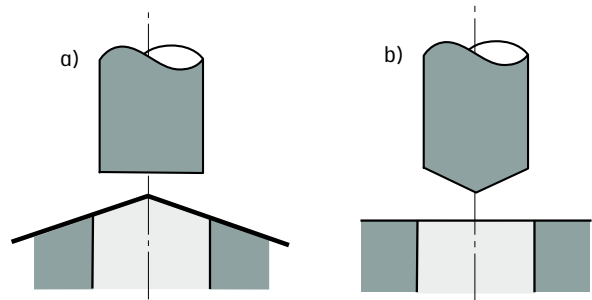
Chamfered tools for a) blanking and b) punching.
